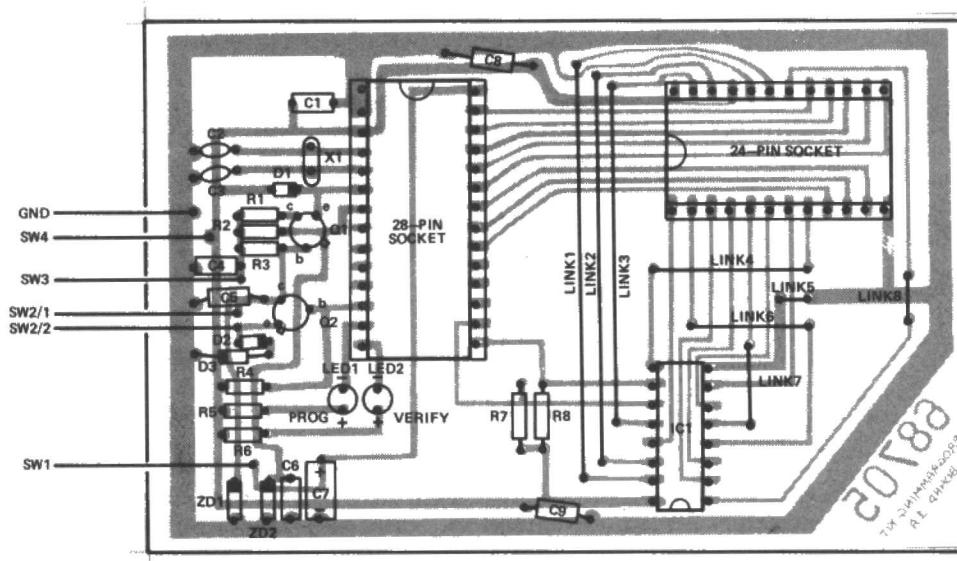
The overlay of the 68705 programming board. Note that because of the compact layout of the board some components may have to be mounted end on. The 68705 device is available both from Magenta and Technomatic both of whom advertise in this issue.
